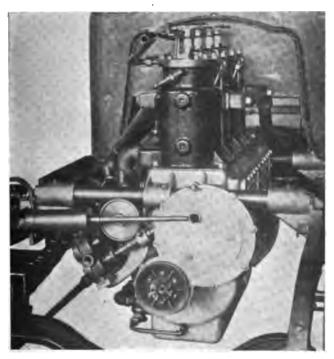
Front end of Silent Knight motor. The tire pump, oscillating cylinder, is driven from a crank wrist in a disk fixed to the cam shaft. When not in use the pump rod gab-end is removed from the wrist and placed on the stud above. This putture shows the fan-shive, and starting ratchet, the water pump, and the oiler cam worm gear and driving worm, as well as the first and second exhaust pipes of the motor, and the motor frame supports.
